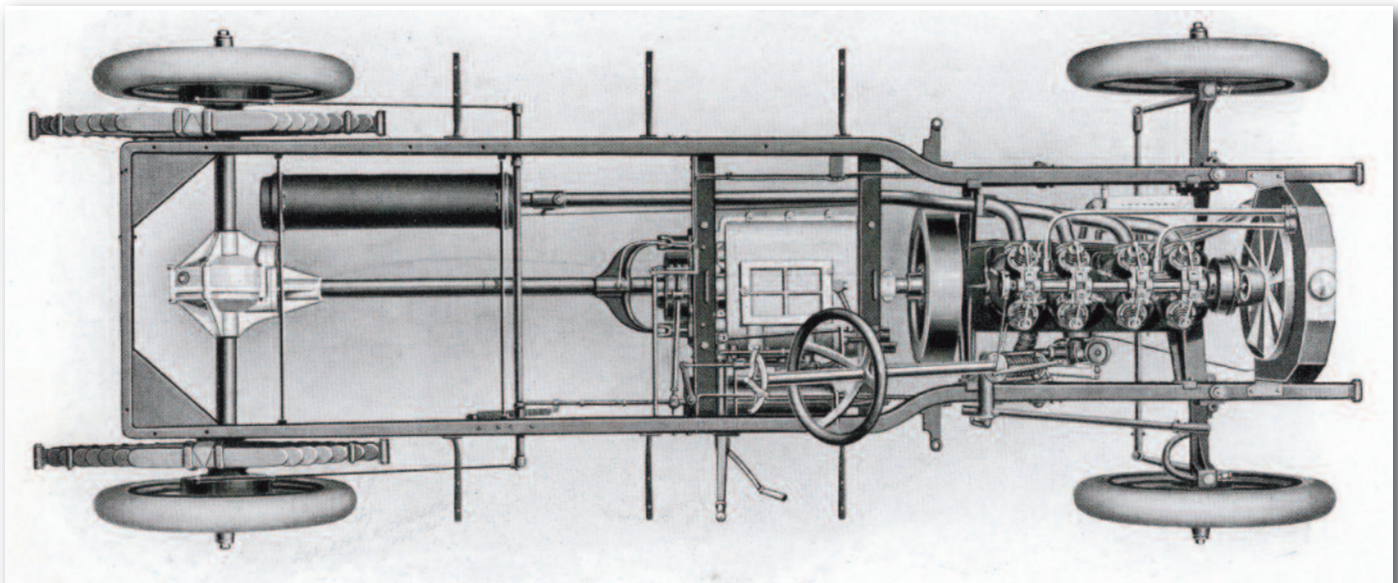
A top view of a 1908 Welch Model 4 chassis. Note the unique valvetrain and spark plug locations.
